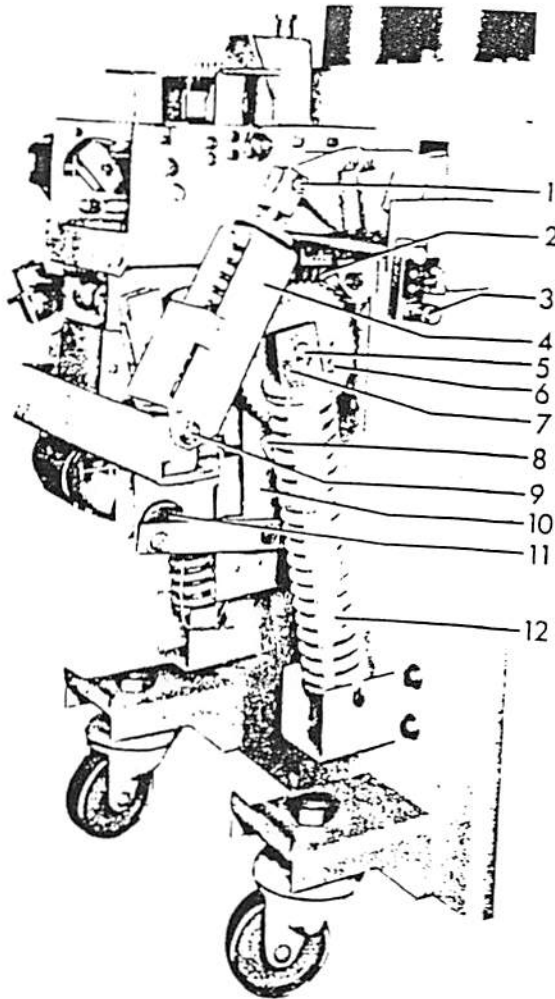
(8040405) Right Side View ML-13 Operating Mechanism
